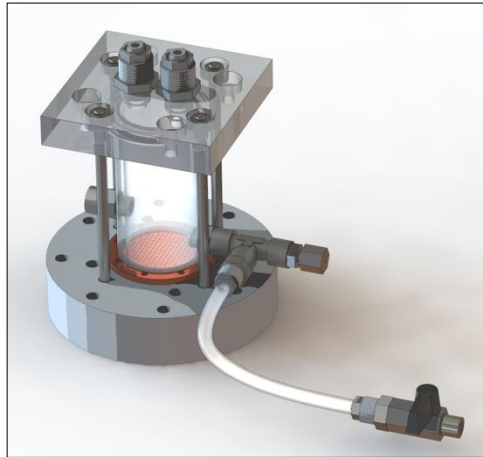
Final evaporator design with horizontal oriented surface (CAD model - SolidWorks).
